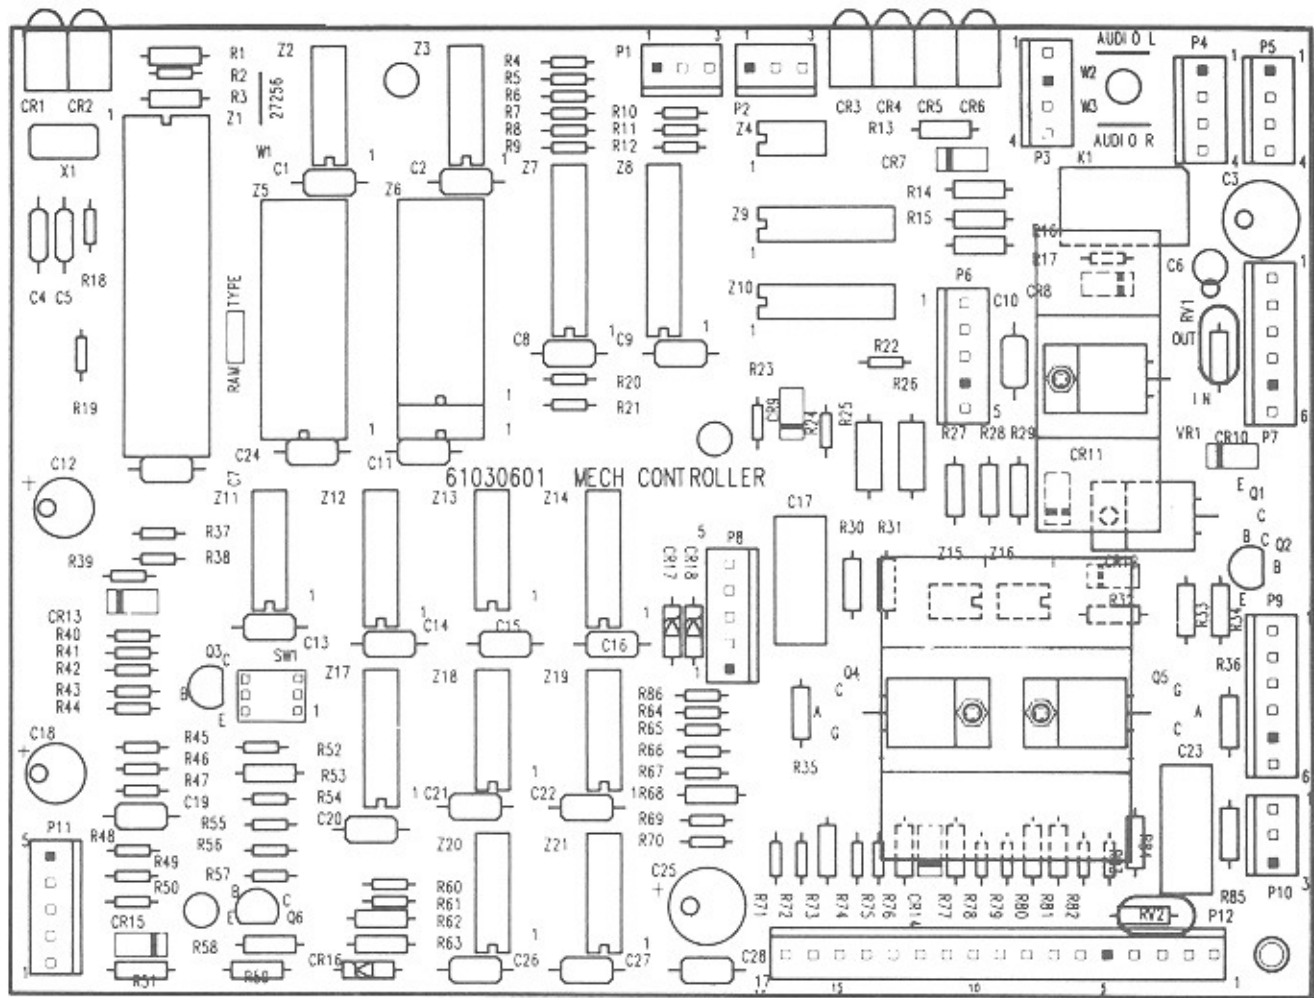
C. Mechanism Control Assembly Circuit Board Layout
